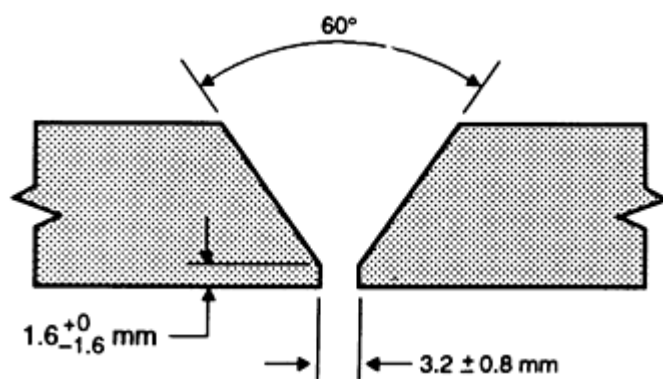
USE OF GROOVES TO FACILITATE OXYFUEL GAS WELDING OF ≤ 4.8 MM ($\leq \frac{3}{16}$ IN.) THICK PLATES
